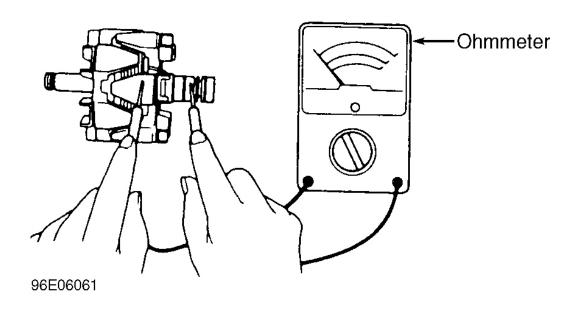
Checking Rotor For Shorts Courtesy of MAZDA MOTORS CORP.
